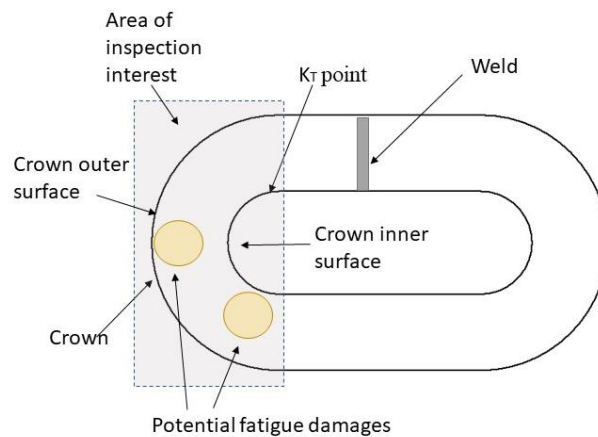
NDT inspection focused areas due to high stress that can cause fatigue cracking [7] [8]
